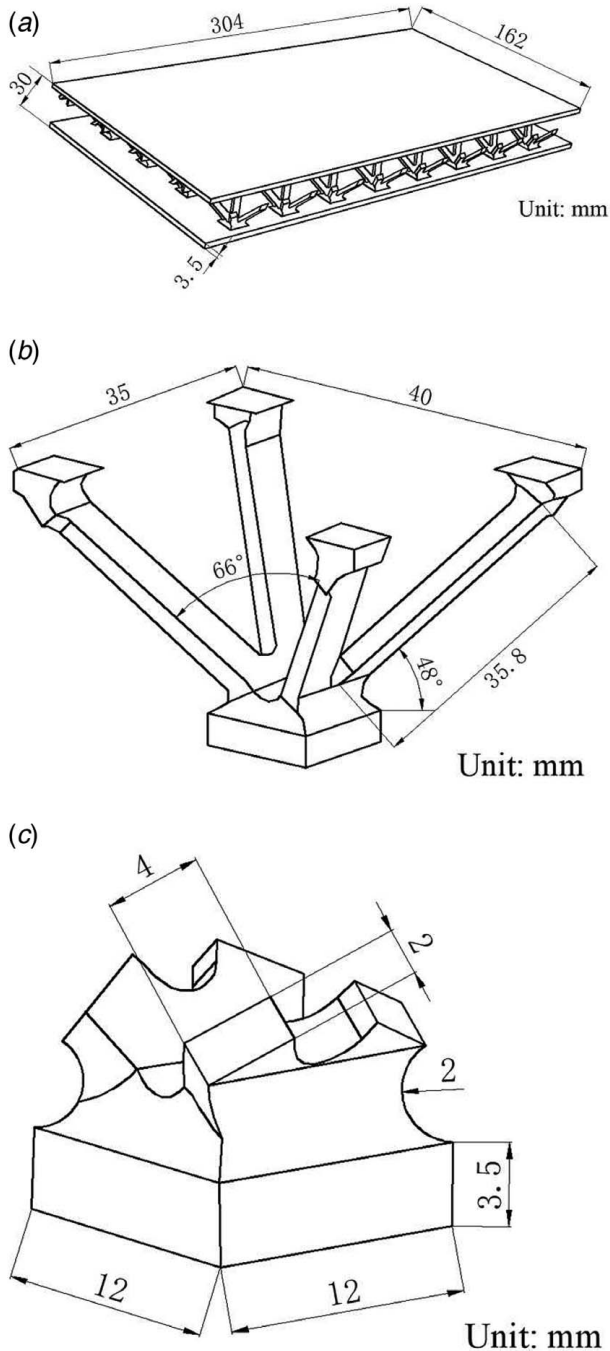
Dimensions of the solid element model of the PTSP with welded joints: dimensions of (a) the whole PTSP, (b) a pyramidal truss unit, and (c) a welded joint
